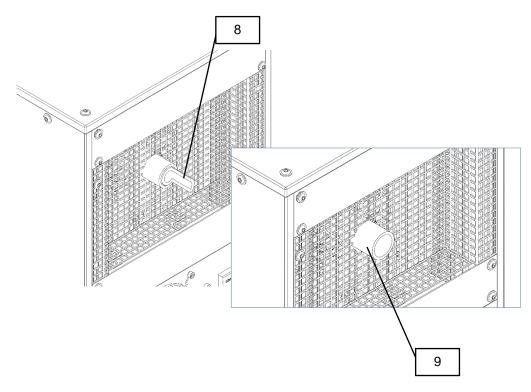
Removing the mechanical stop on the dish and combustion tube on the back
